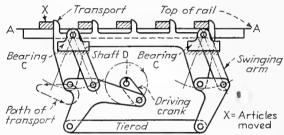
This is another form of transport mechanism wherein a link motion is used. The bearings C are supported by the frame, as is the driving shaft D.
